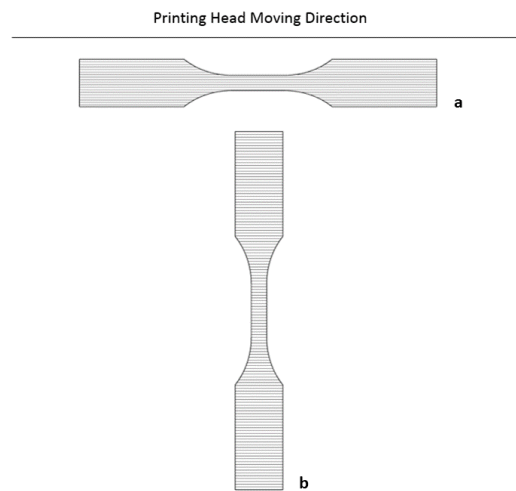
Schematic of two tensile samples 3D printed with their long edge coinciding with the printing head movement (a) and with the long edge transverse to the printing head movement (b).
